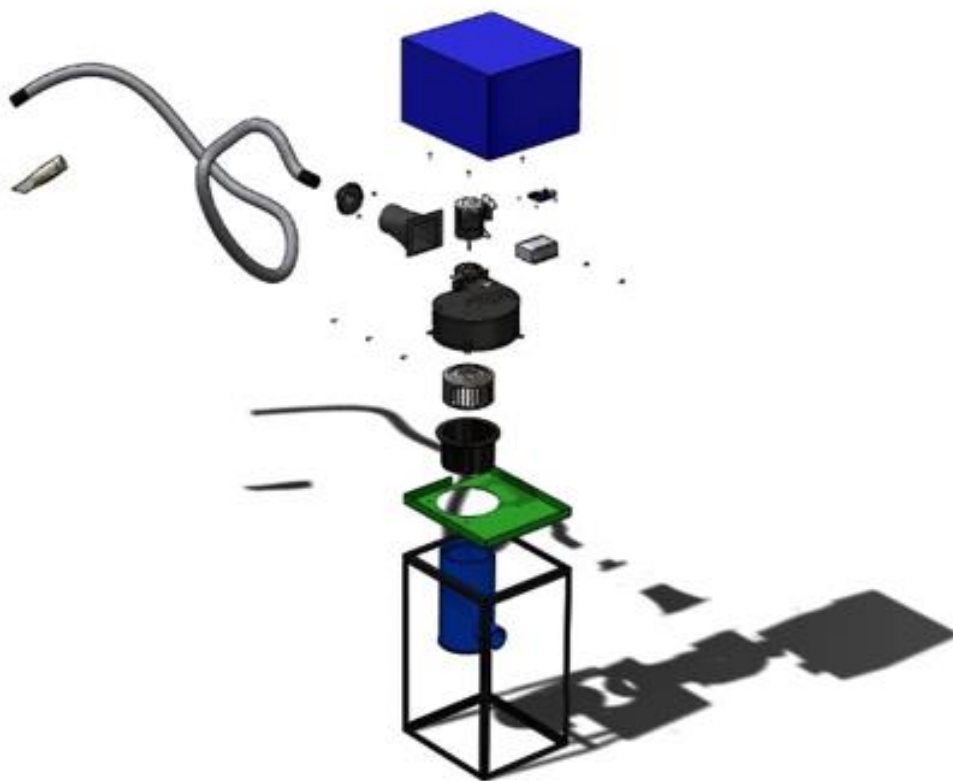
Exploded View of Mechanical Rendered Model Using Solid Works.
